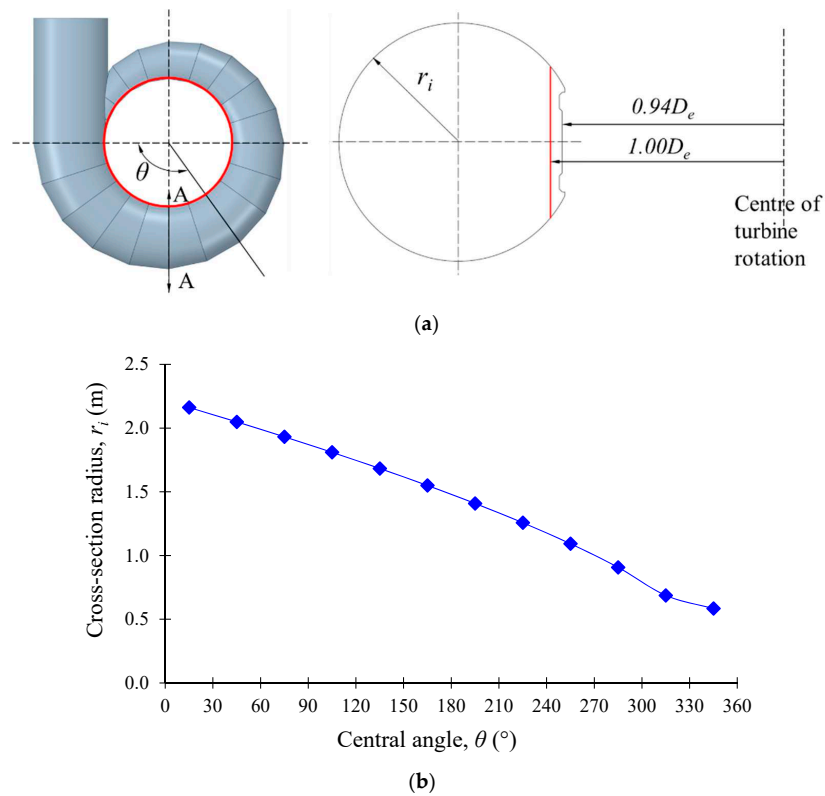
(a) Parametric design and (b) initial cross-section radius of casing (red line indicates measuring location).
